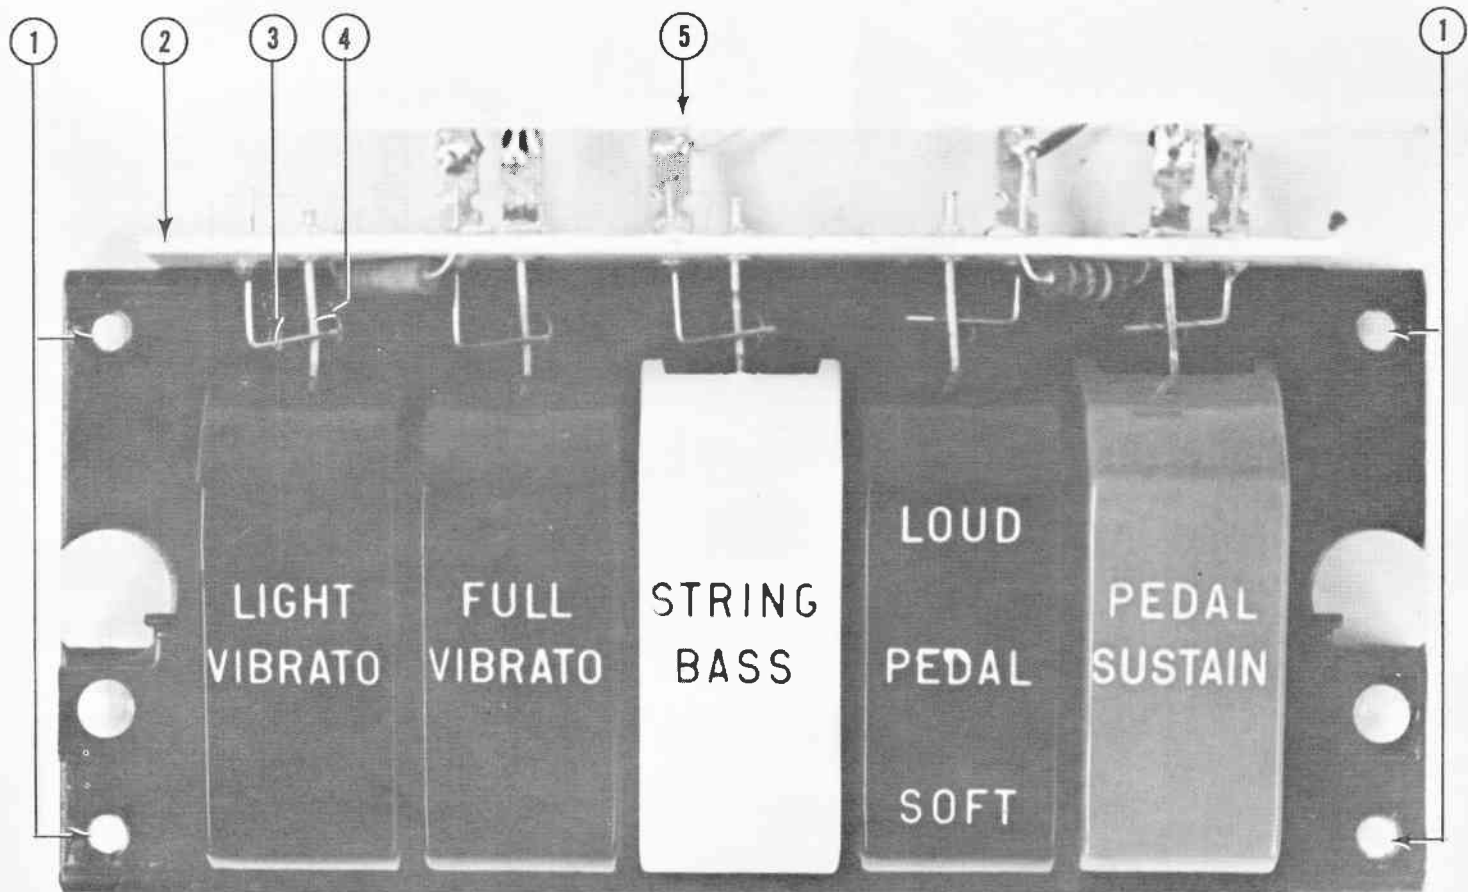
STOP TAB SWITCHES DISASSEMBLY
